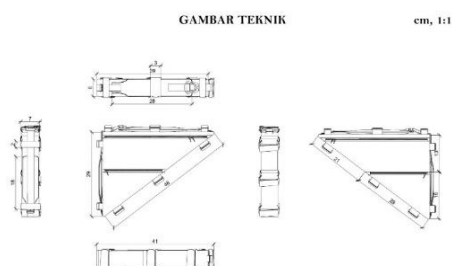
Technical drawing of the detachable triangular bikepacking bag (top, front, side, rear, and bottom views) at 1:1 scale in cm
